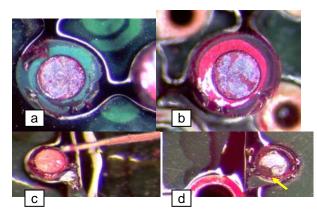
, Dye testing results; a, b) board side IMC failure and associated ball removed with component; c, d) PCB pad crater component and ball side.
